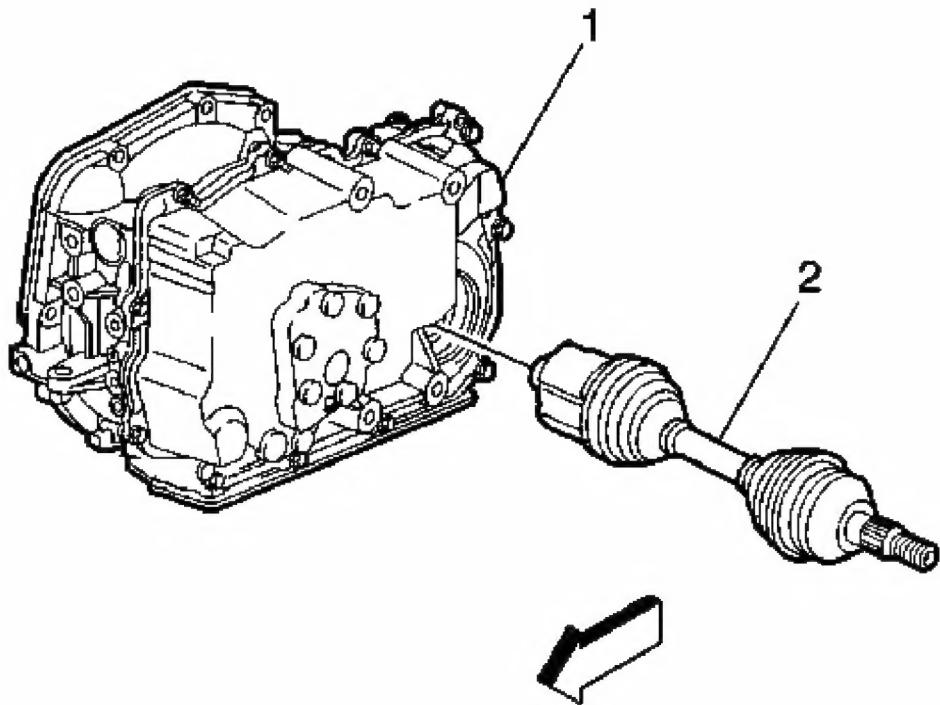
Removing/Installing Wheel Drive Shaft From/To Transaxle
